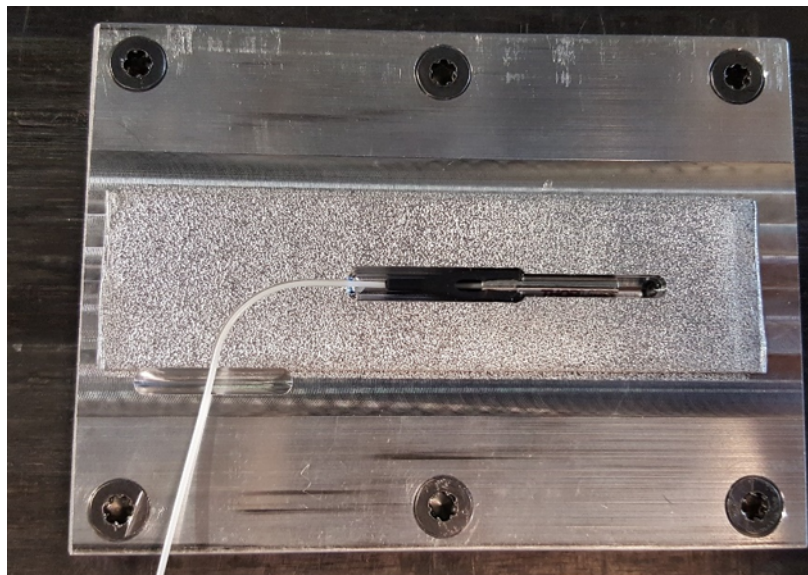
The lens and fiber have been installed into the channels of the UAM structure. Note the rough surface texture around the embedded sensor which is imparted by the UAM process after welding each layer. This texture can be easily machined away.
